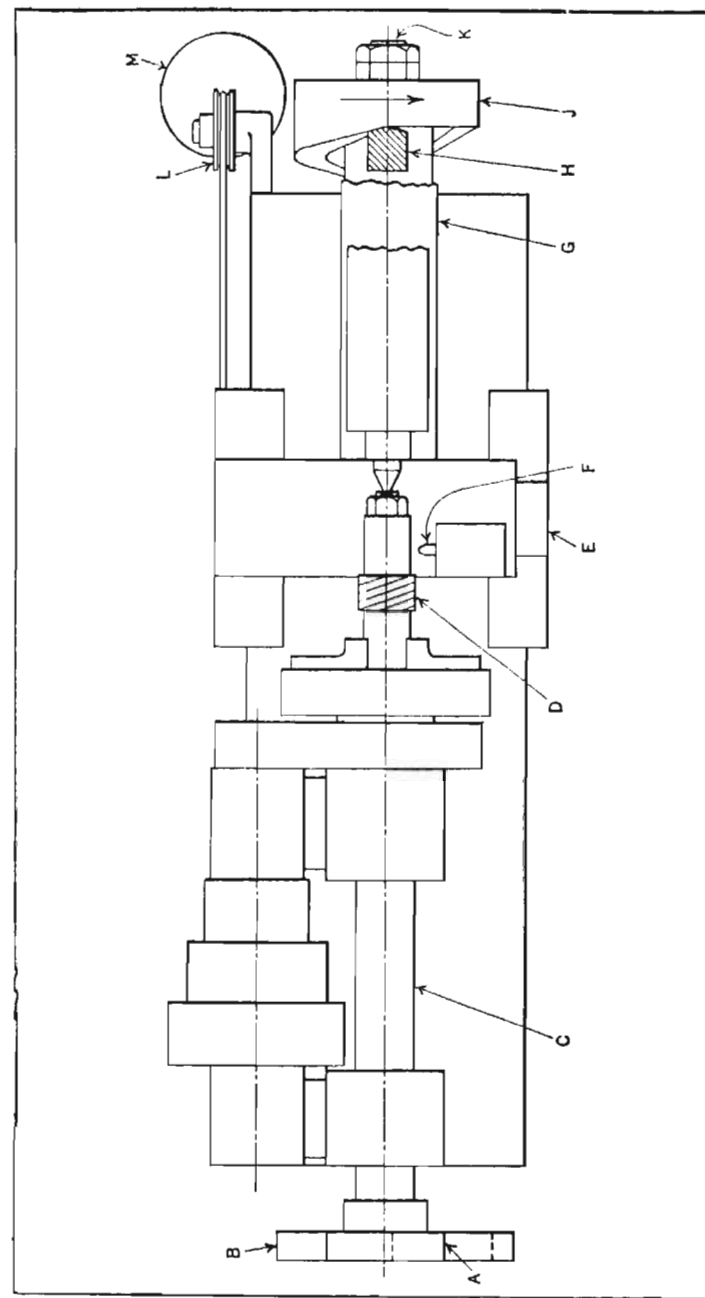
Redesigned Automatic Threading Lathe in which a Simple Cam and Change-gears Serve to Index the Work when Chasing Quadruple Threads by Rotating the Work  $1 \frac{3}{4}$  Turns to One Cam Revolution
